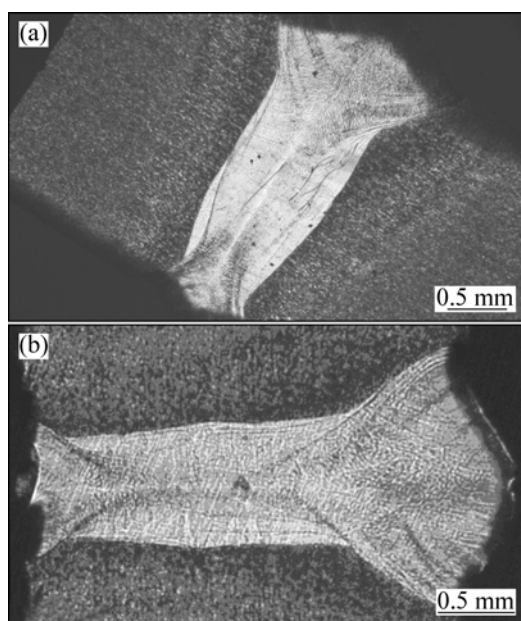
Macrostructures of cross-sections in laser beam welding performed at: (a) Parameters 1; (b) Parameters 2
